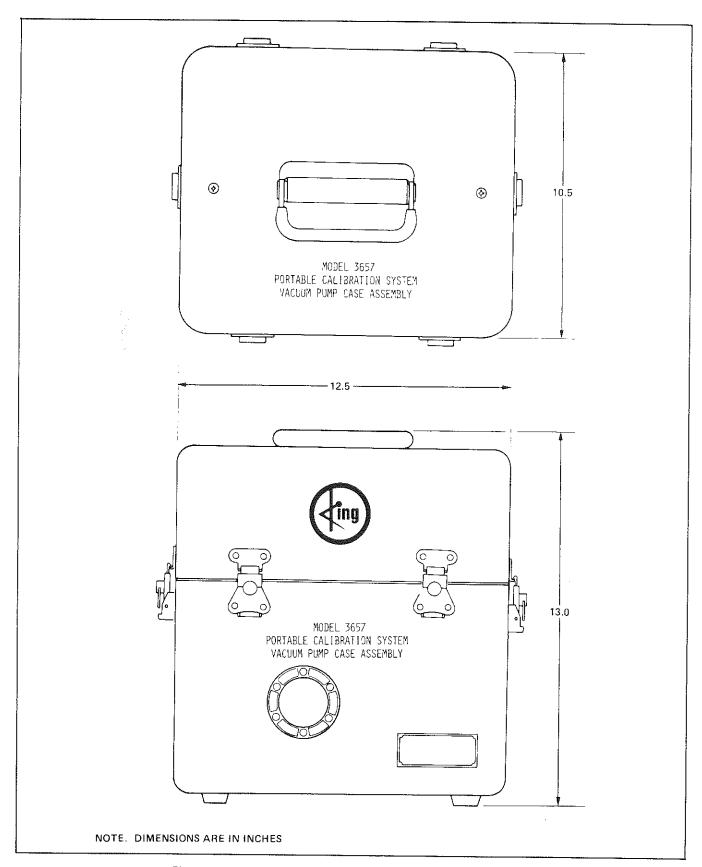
Installation Drawing — Vacuum and 15 Psig Gauge Case and Vacuum Pump Case Assembly
